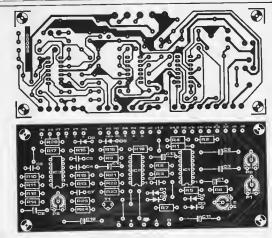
, Printed circuit board and component layout for the clock pulse generator.
